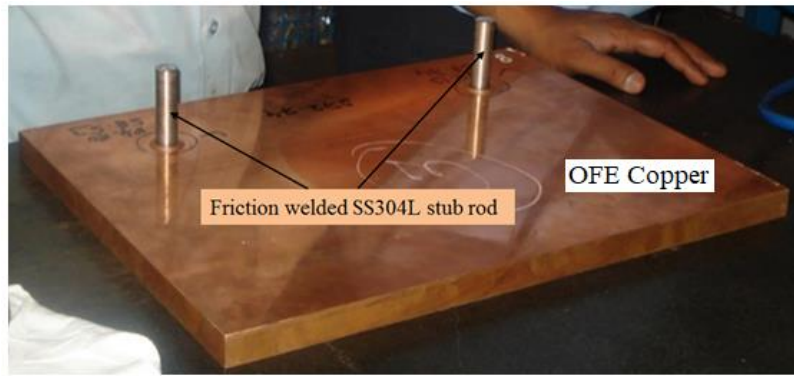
Friction welded SS304L rod with OFE copper plate (IPR will provide it as a FIM)
